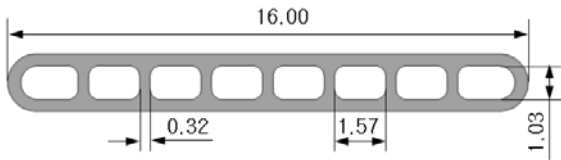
Cross-sectional view of the flat tube used in this study (unit: mm)
